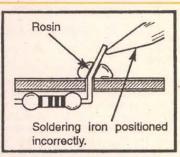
Don't put the solder iron tip up on the component lead. Wrong!
